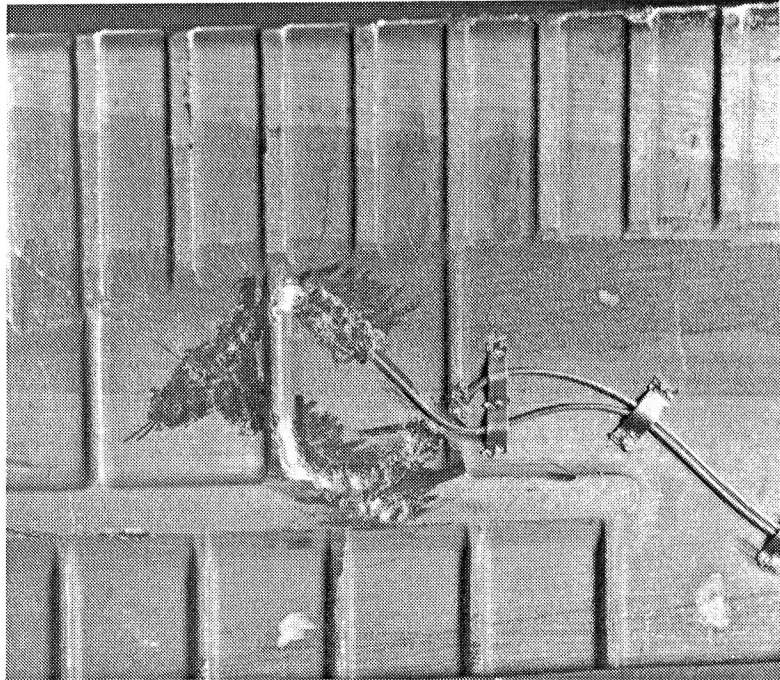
Embedded Thermocouple Sensor - Chromel and Alumel Leads Installed in Blade Inside Surface Rear Cavity
